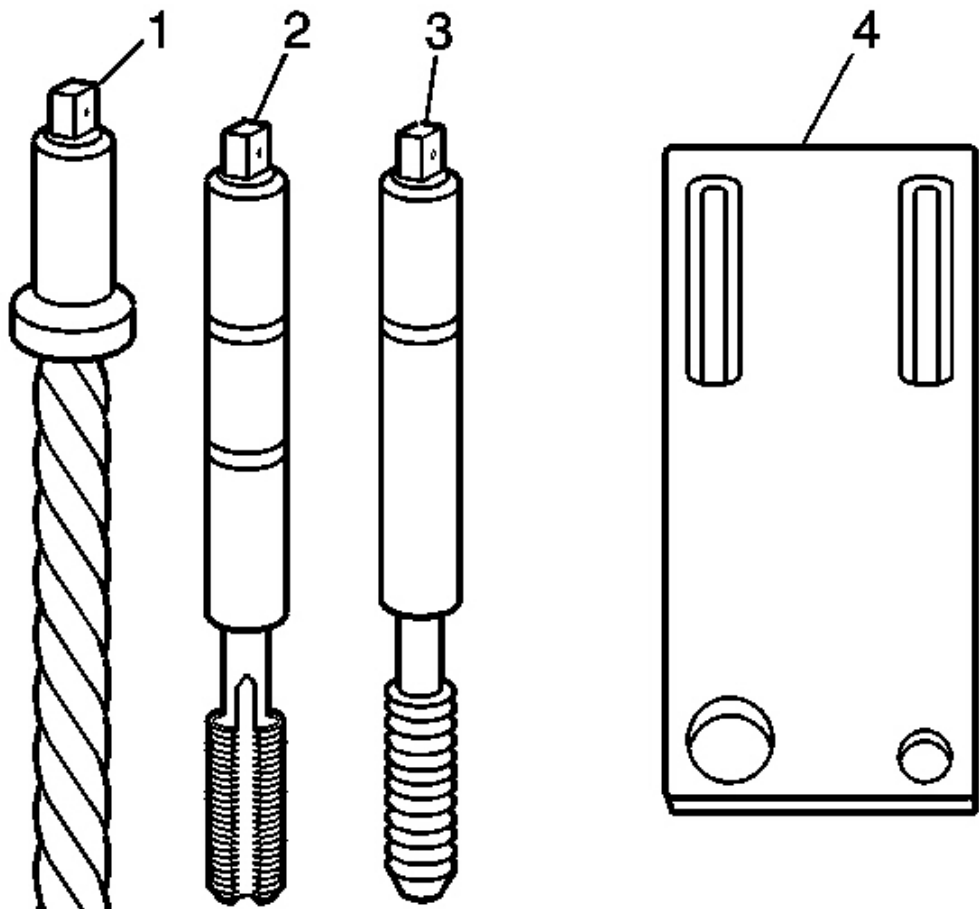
Exploded View Of Main Cap Bolt Hole Thread Repair Kit
